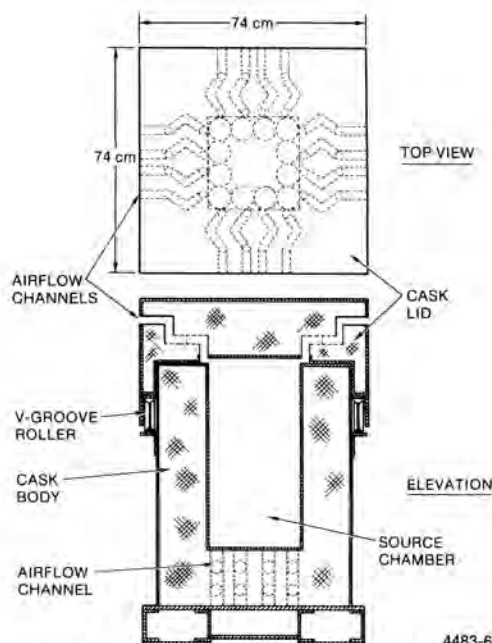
Top View of Lid and Elevation Cross Section of Storage Cask.
